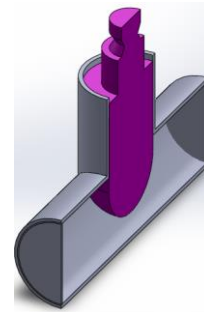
Corrosion-proof throttle valve Aisi 304 (L)/316 (L) DN 40
